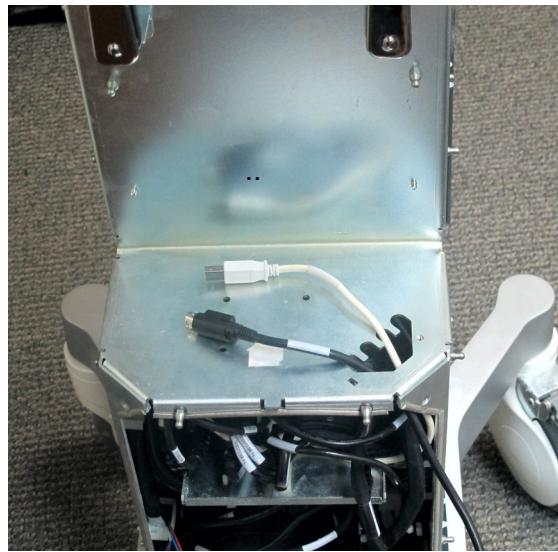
Printer Cables Routed Through Dedicated Opening
